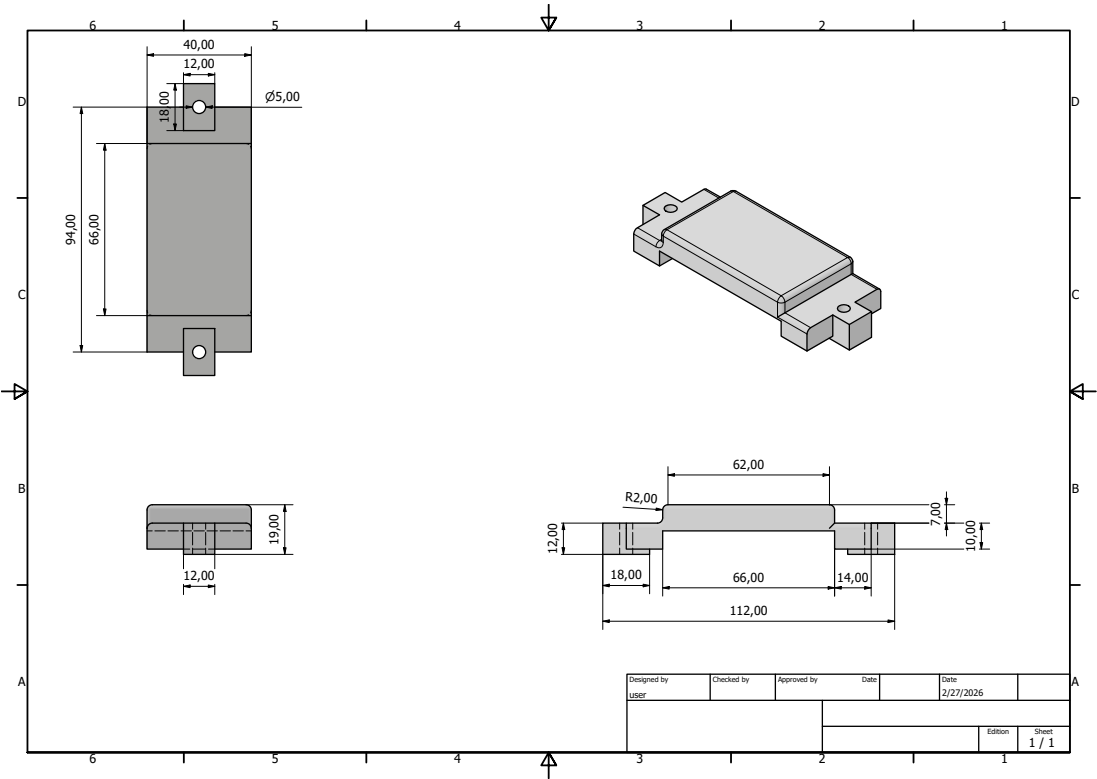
18650 battery case cover – 2D manufacturing drawing with title block
